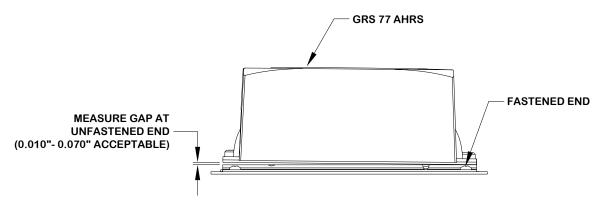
Measuring GRS 77H to Mounting Rack with Feeler Gauge
